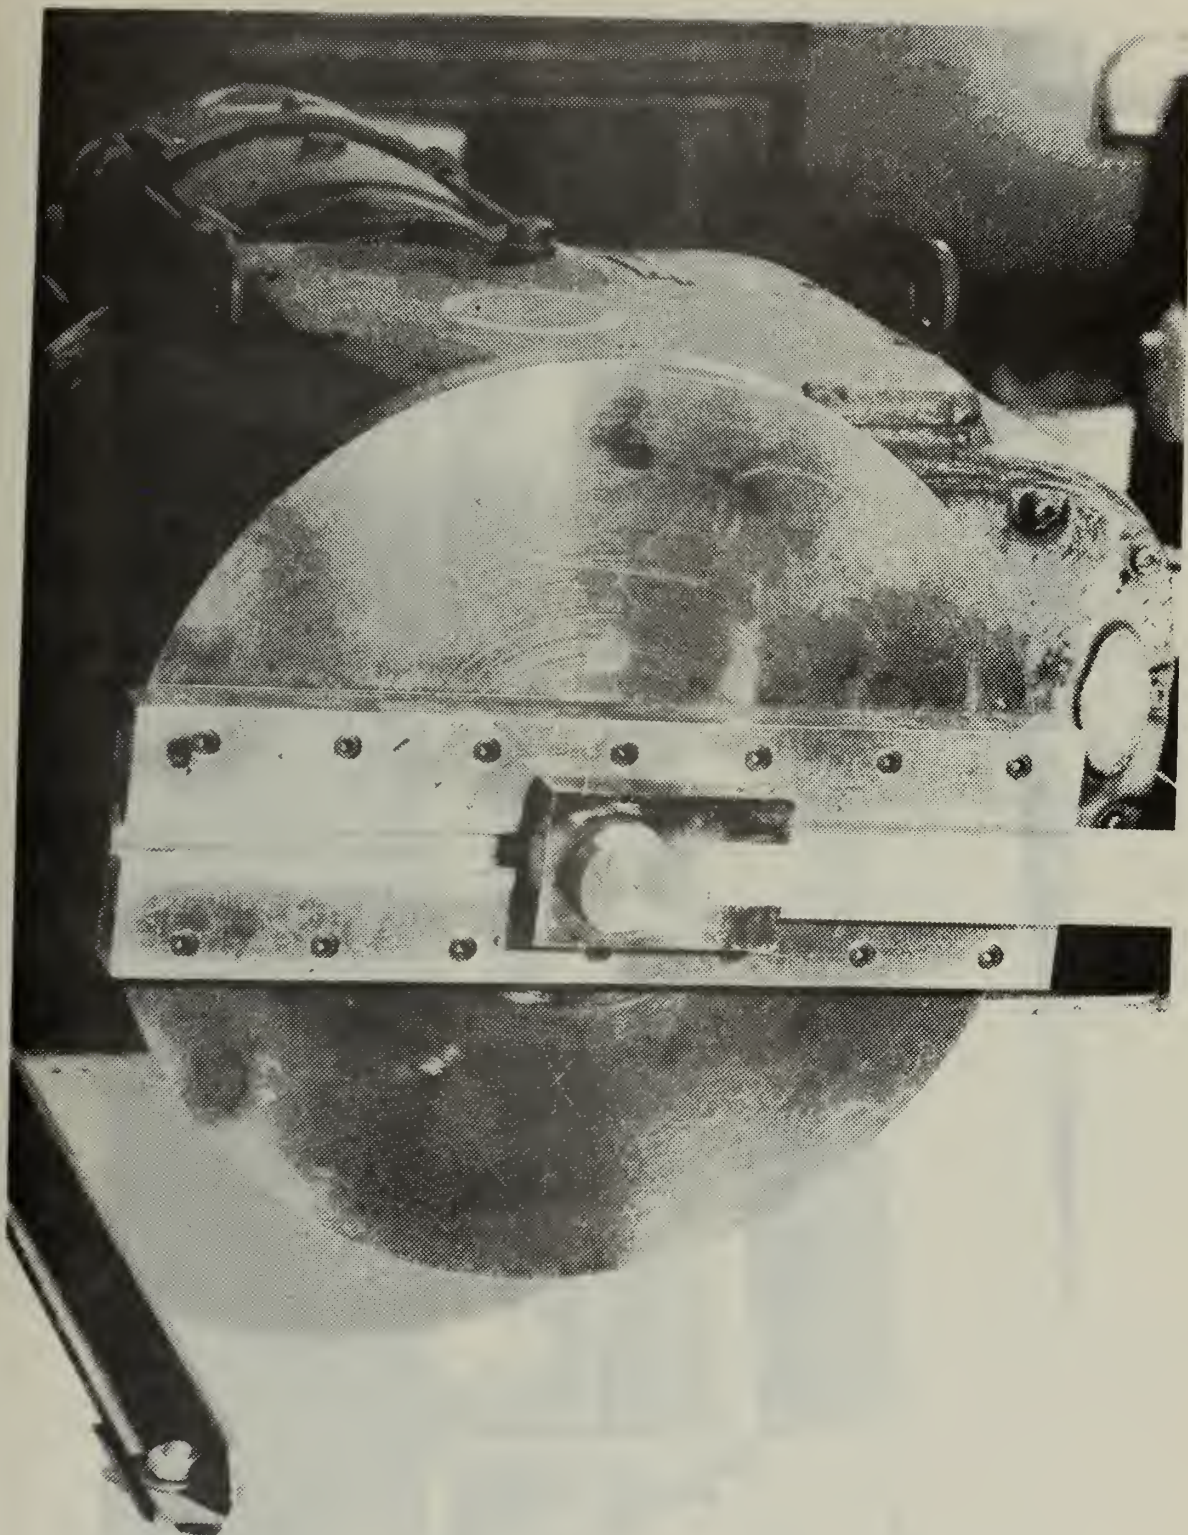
FACE PLATE WITH BOLT AND SLOT ASSEMBLY
